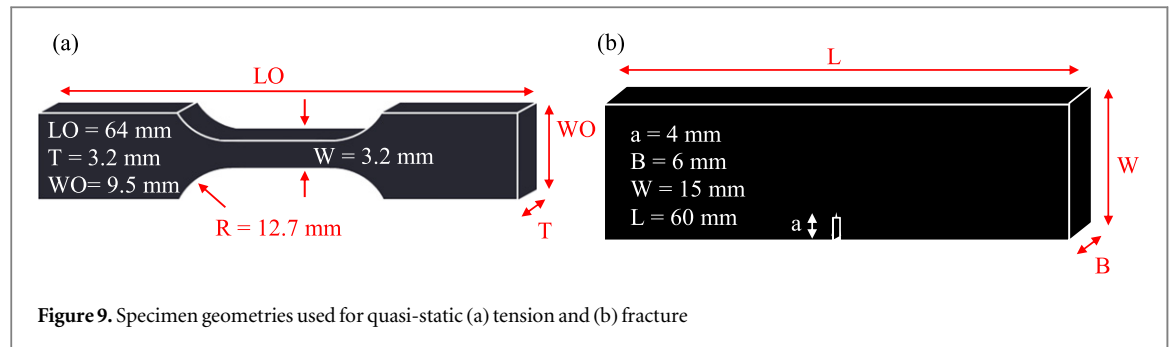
Specimen geometries used for quasi-static (a) tension and (b) fracture
